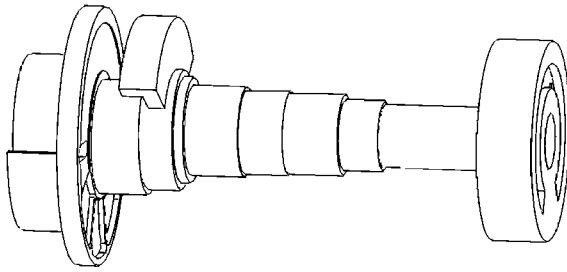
Crankshaft rotor simplified physical model of scroll compressor
